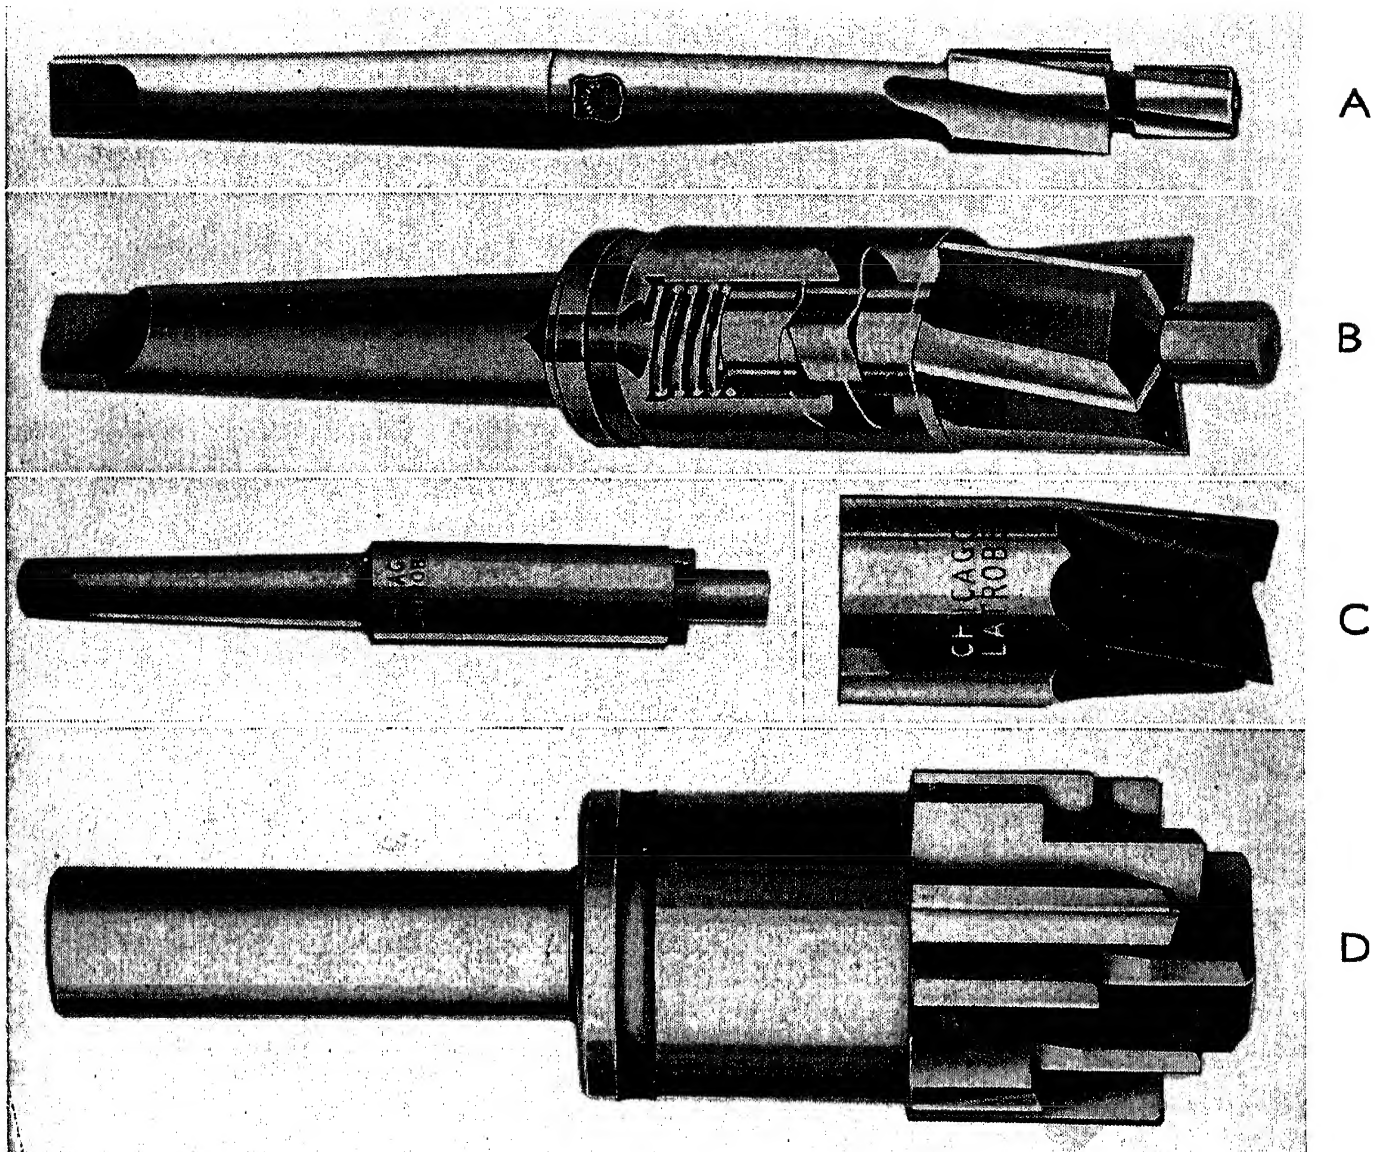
Typical boring and counterboring tools. A. A solid taper shank counterbore with integral pilot. (Courtesy The Standard Tool Co.) B. An interchangeable counterbore. The cutter has a short shank with two driving lugs. It is inserted in the tapered shank holder and locked in place with a one quarter turn, as indicated by the phantom view. The cutter can easily be removed from the driver and replaced with another. The pilot is replaceable. (Courtesy Ex-Cell-O Corp.) C. A replaceable counterboring tool and its holder. The cutter fits over the small diameter and is driven by the keys on one end of the driver. (Courtesy Chicago-Latrobe Twist Drill Works.) D. A special multi diameter boring cutter for machining 8 surfaces in one operation. (Courtesy Eclipse Counterbore Co.)
